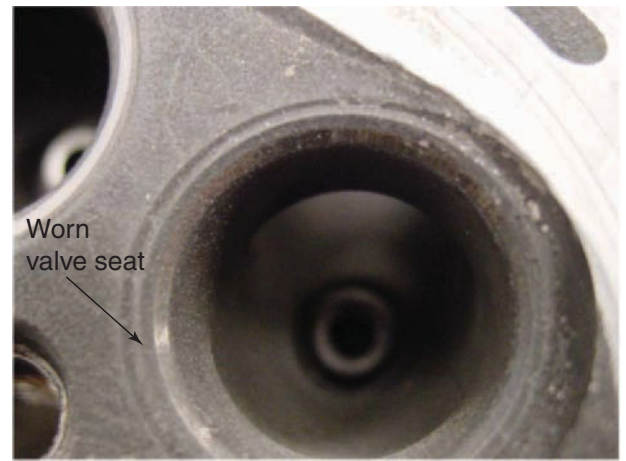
A worn valve seat will not seal the combustion chamber properly.
